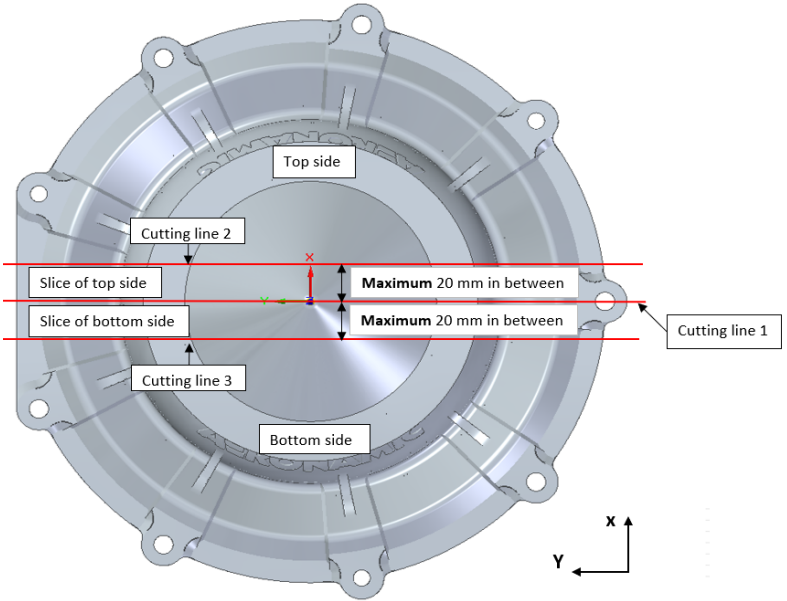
Top view of the inlet housing part showing the first three cutting lines.
